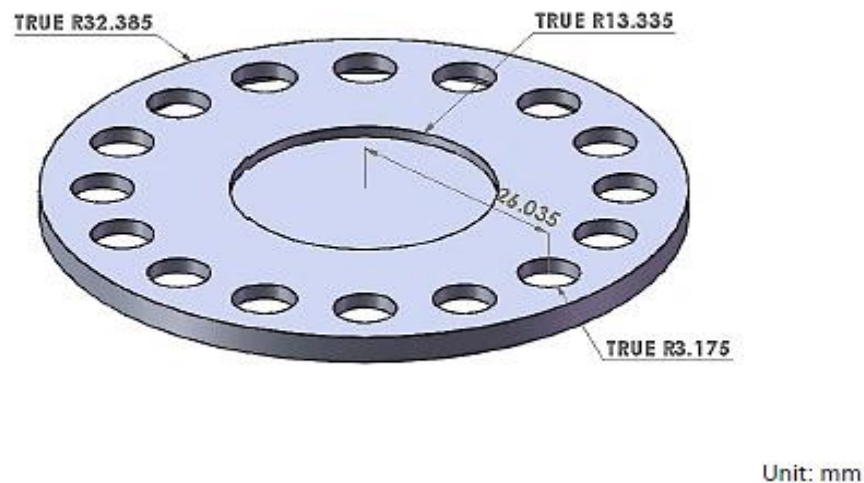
13 Isometric drawing view of a 64.7 mm substrate holder.
